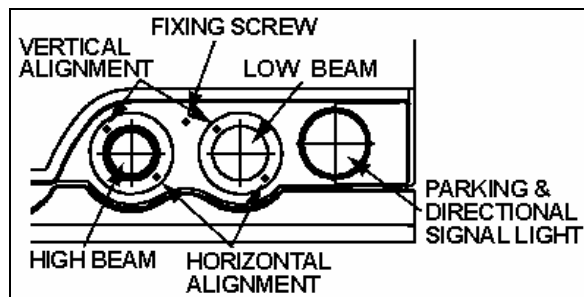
HEADLIGHT ASSEMBLY 06546
